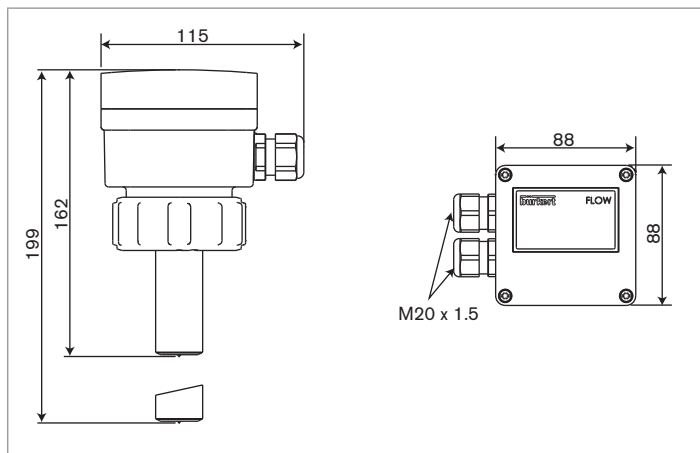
Dimensions of the 8041 transmitter [mm]
